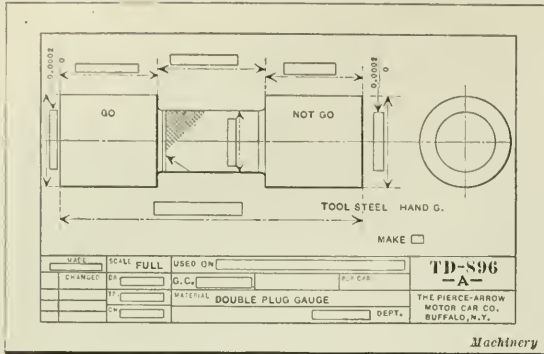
Common Type of Blocked-in Drawing for Use in Shop
